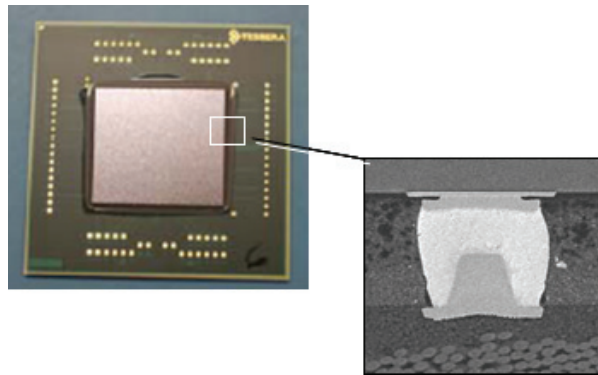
Bumped flip-chip to μ PILR™ post reflow solder interface
